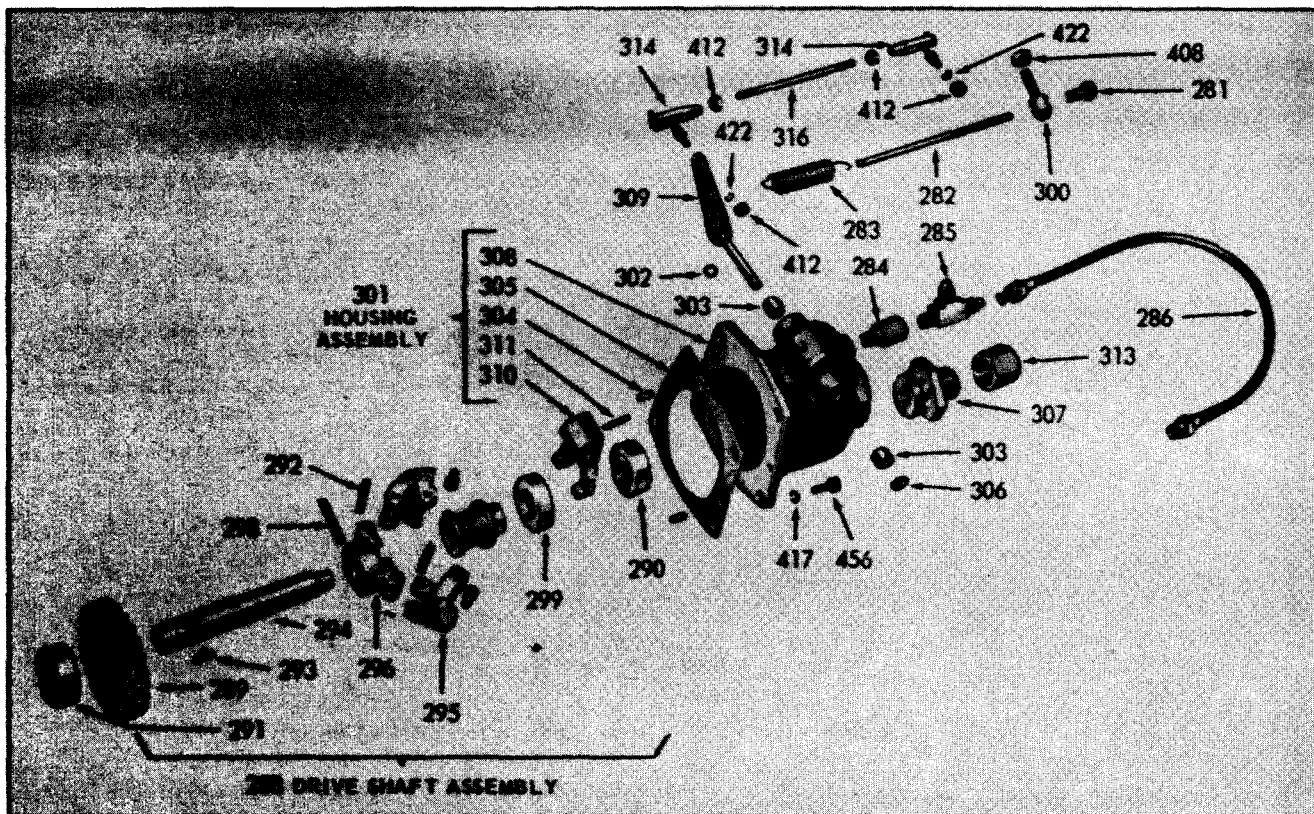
, Ref. No. 279, GOVERNOR ASSEMBLY FOR MIL-E-11275-C and MIL-E-11275-B ENGINES
